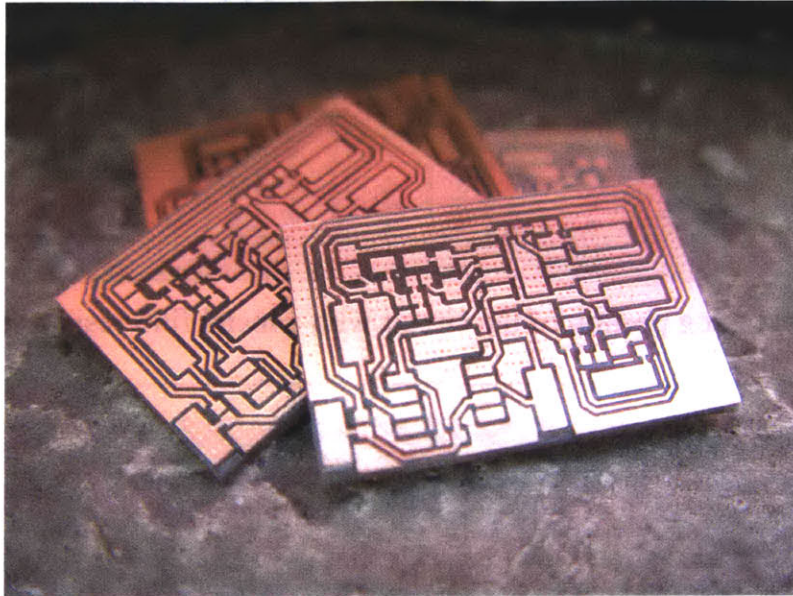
First design for analog portion of the circuit on a PCB (components not soldered to the board).
